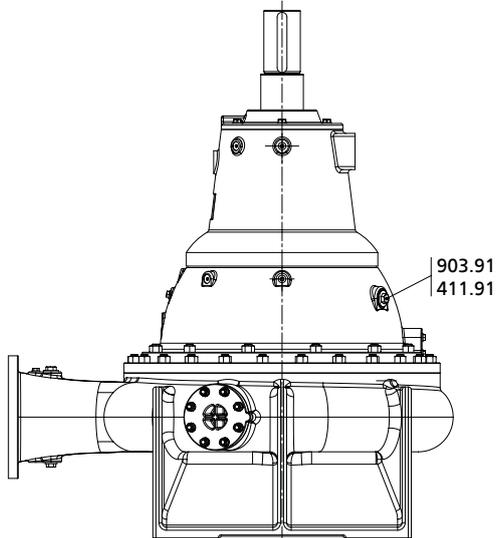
Drilled hole required during manufacturing, bearing brackets S09 and S10
